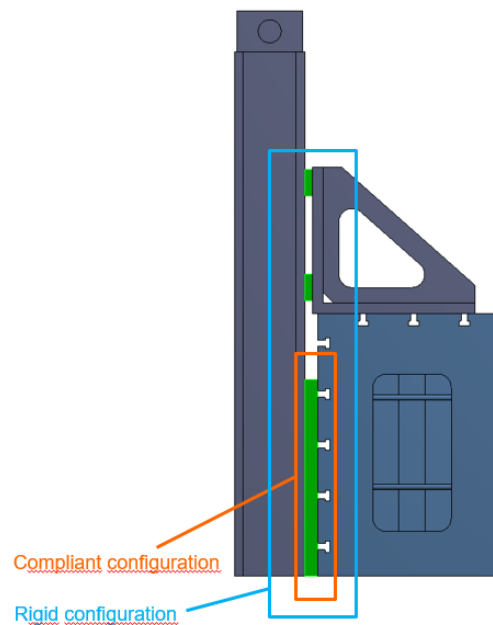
Conception of the testing stand with a ram to test controlled vibration damper [10]
